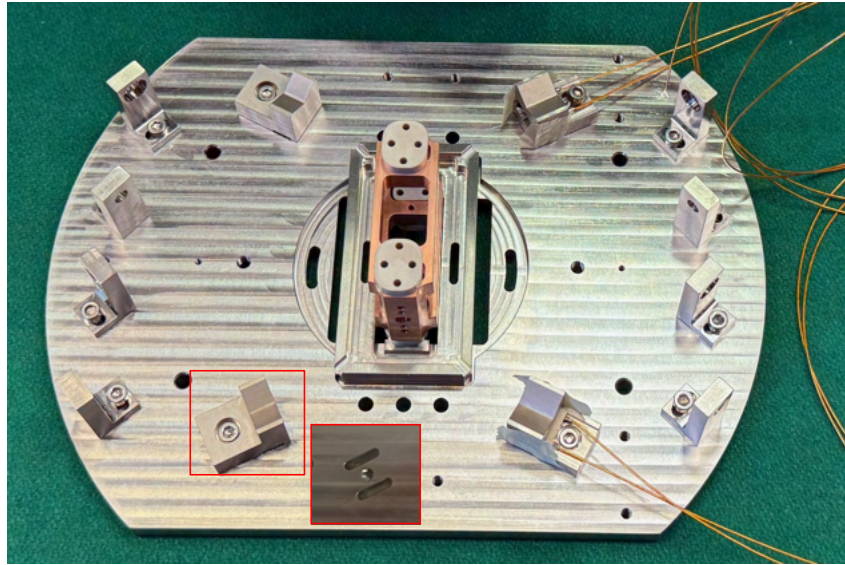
Test assembly of the final machined parts onto the science platform.
